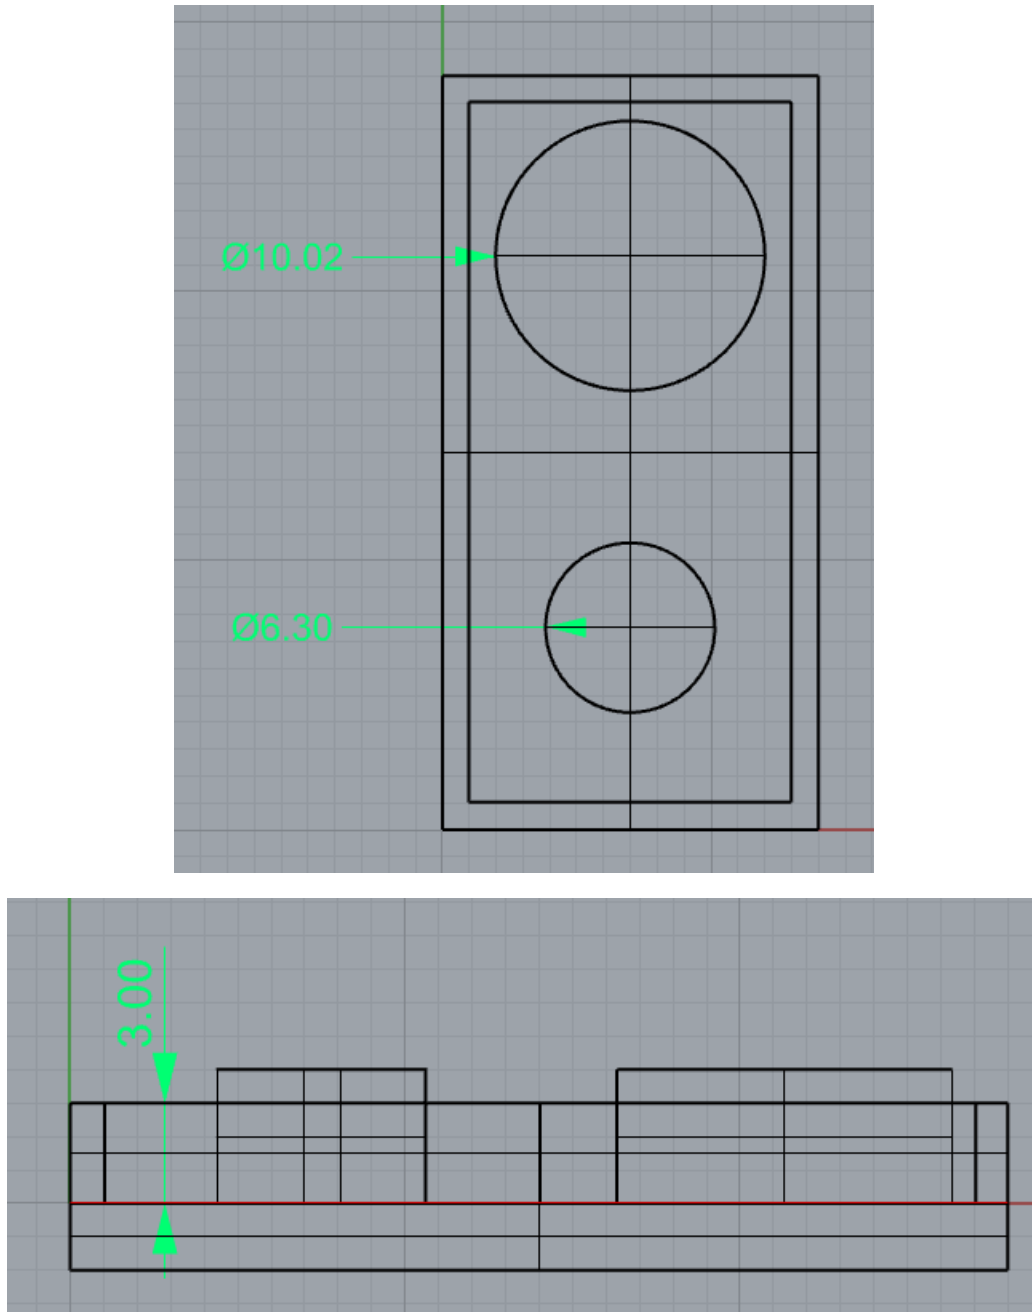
Upper and lateral view with dimensions – top layer.
